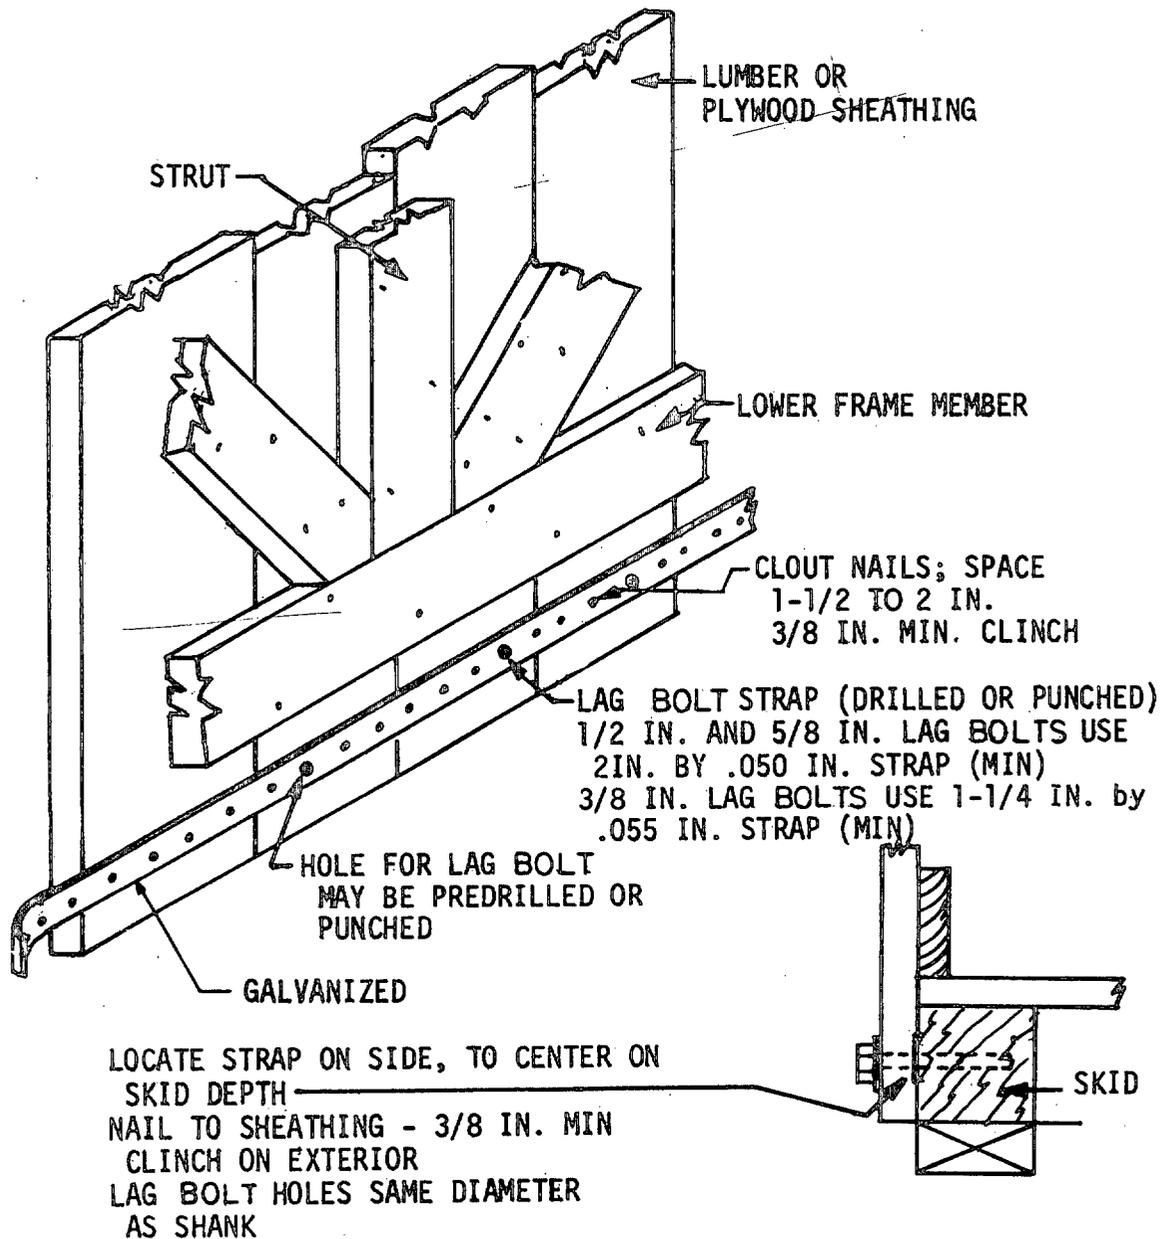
Lag bolt reinforcing strap for bolted crates.
